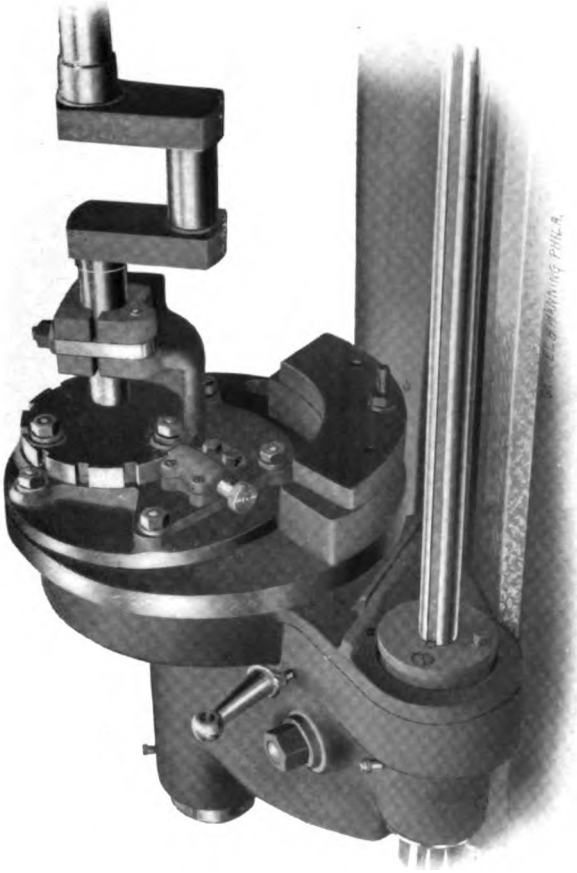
Crank Grinder Adjustable Work Carrying Head, showing method of holding cranks when grinding the wrists. For general description see pages 9 and 11, cut Fig. 1, page 33.
